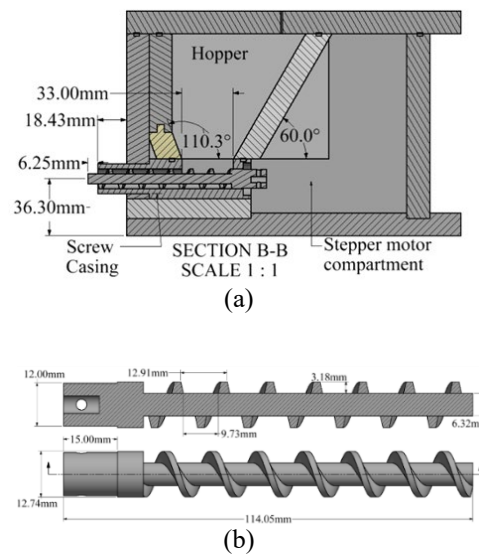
Diagram of the particle feeder design. (a) shows a lateral view of the container with the hopper and conveyor device; (b) shows the screw.
